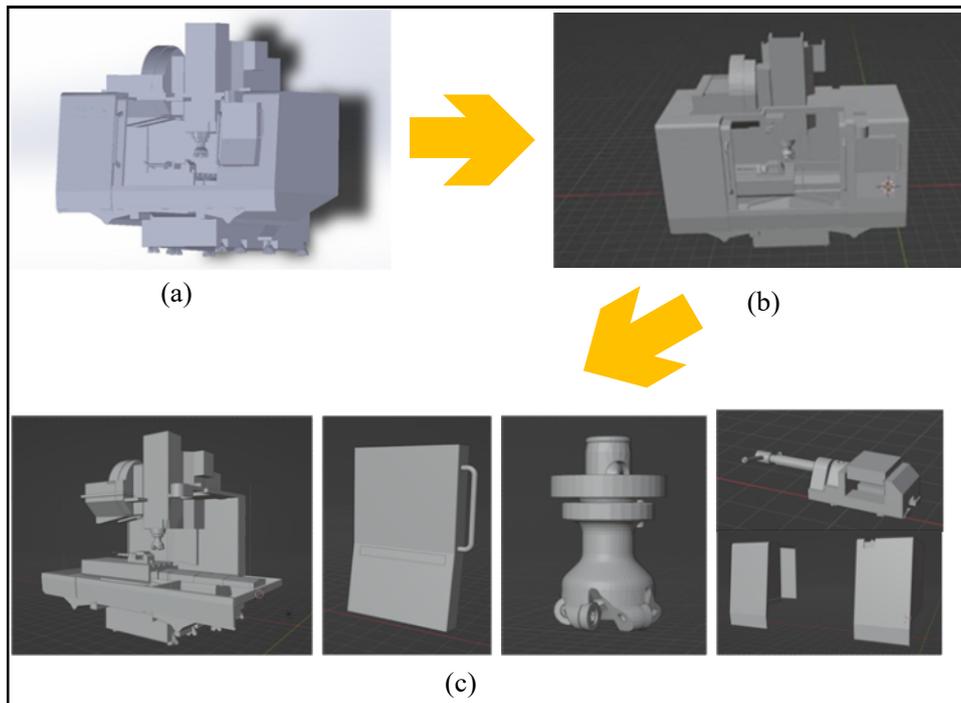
Milling machine modeling with Blender; (a) 3D model in Solid works, (b) 3D model in Blender, (c) the machine's important parts are separated
